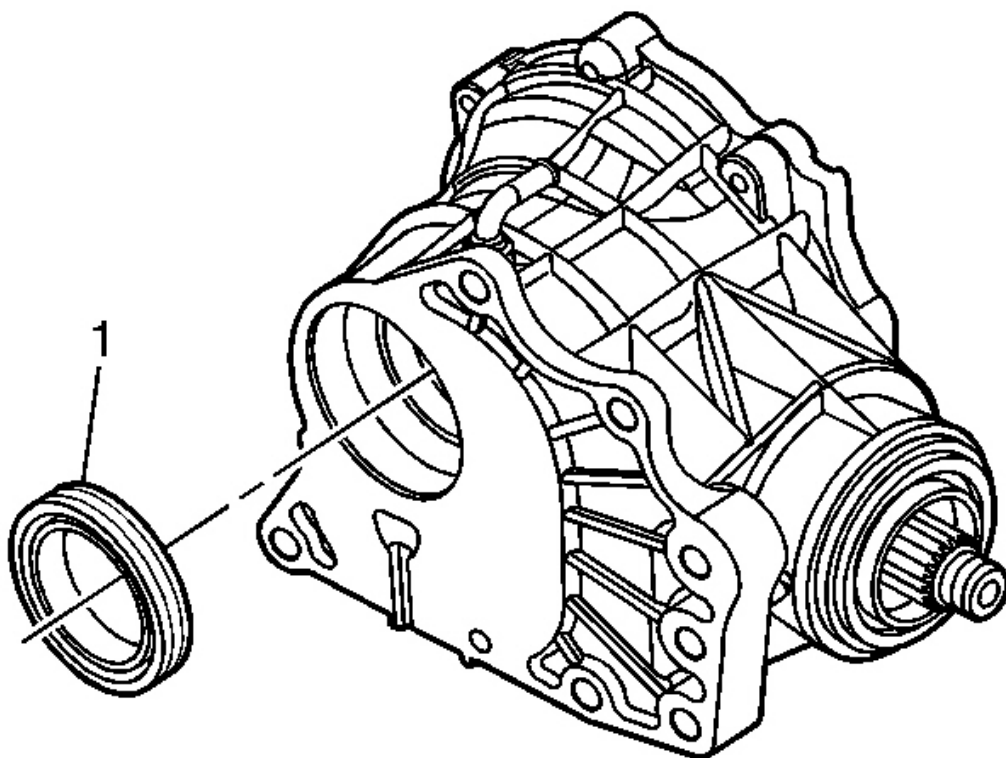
Removing Bearing Cup or Shims In Order To Remove Seal From Carrier Assembly
